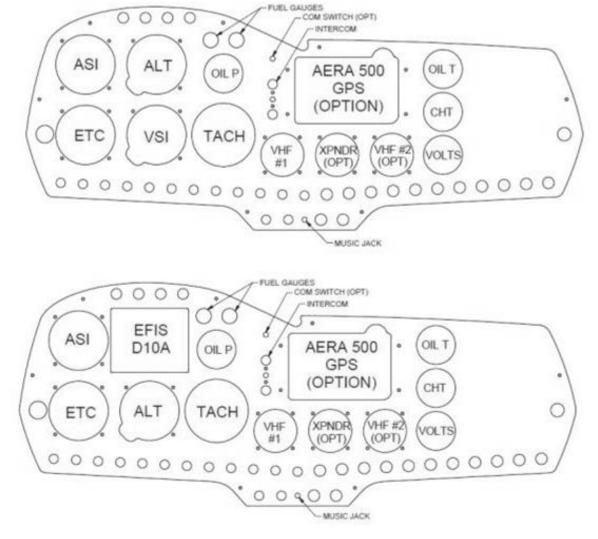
Instrument Panel Layout Type 4 (all J-Series)
